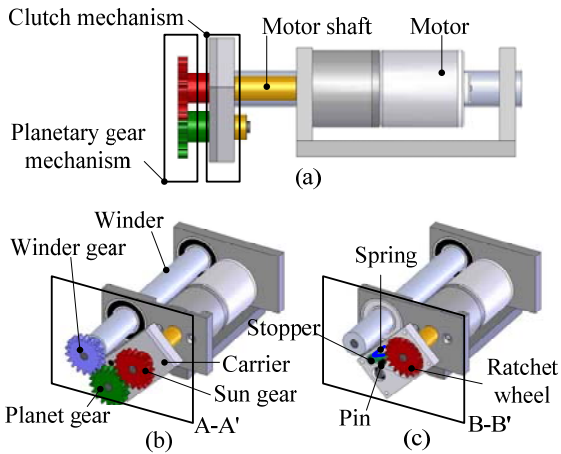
Clutch mechanism; (a) front view, (b) planetary gear part, (c) clutch part.
